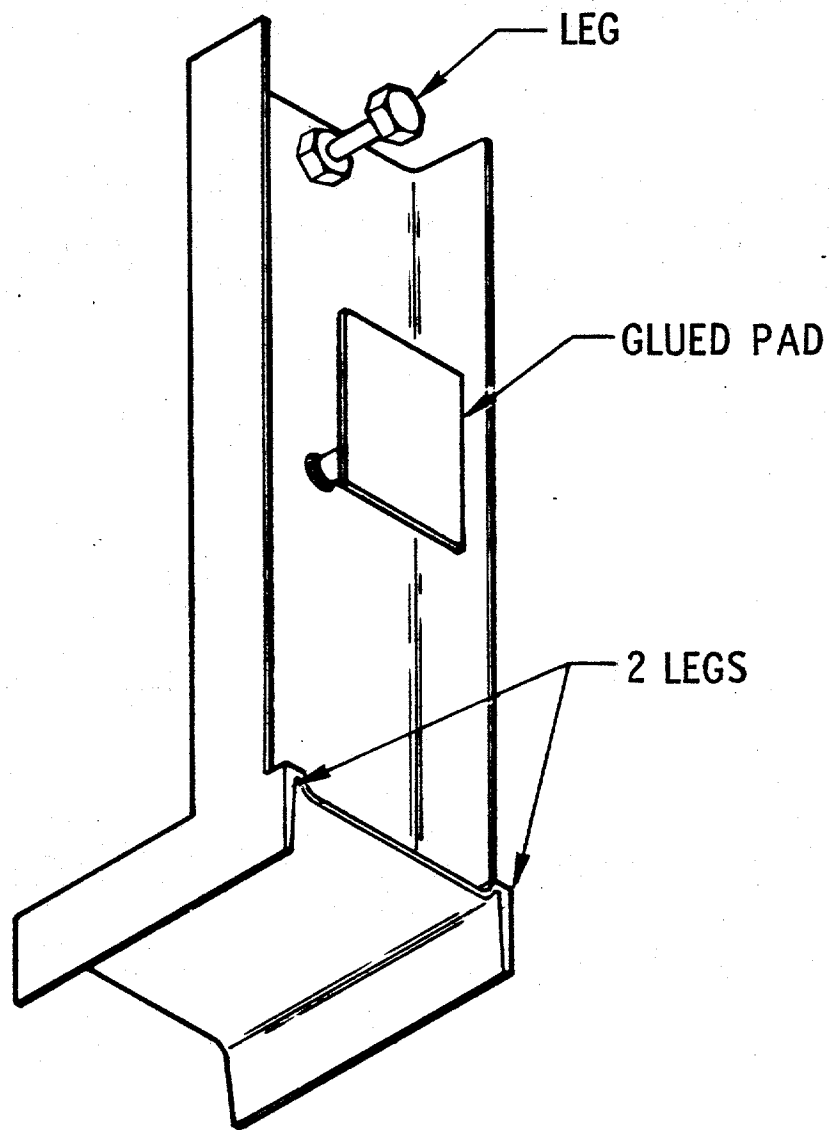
Rear View of the Accelerometer Illustrating the Glued Pad and Mounting Legs
